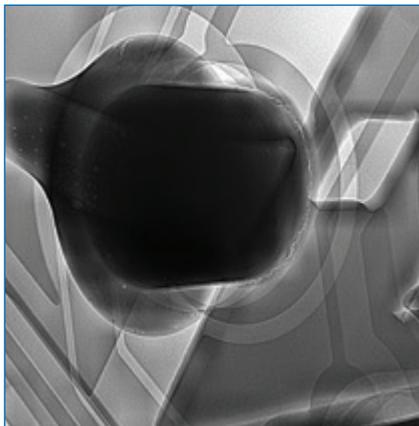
Magnified oblique angled x-ray image of low-temperature solder joint after 2,000 thermal cycles showing cracking all around the joint.
